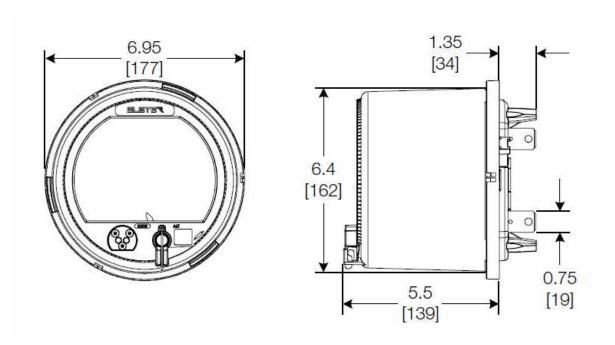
1. S-base Meter Type and Dimensions in Inches (millimeters) - Front and Side View Figure 1 - 2 and Figure 1 - 3 illustrate the A-base meter type and dimensions.
